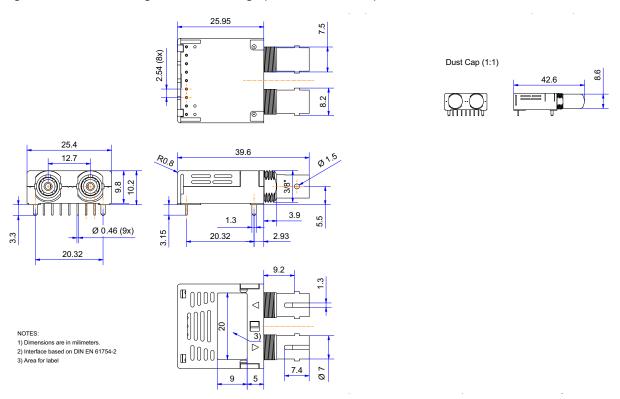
2 × 9 ST Package Outline Drawings (Dimensions in mm)
